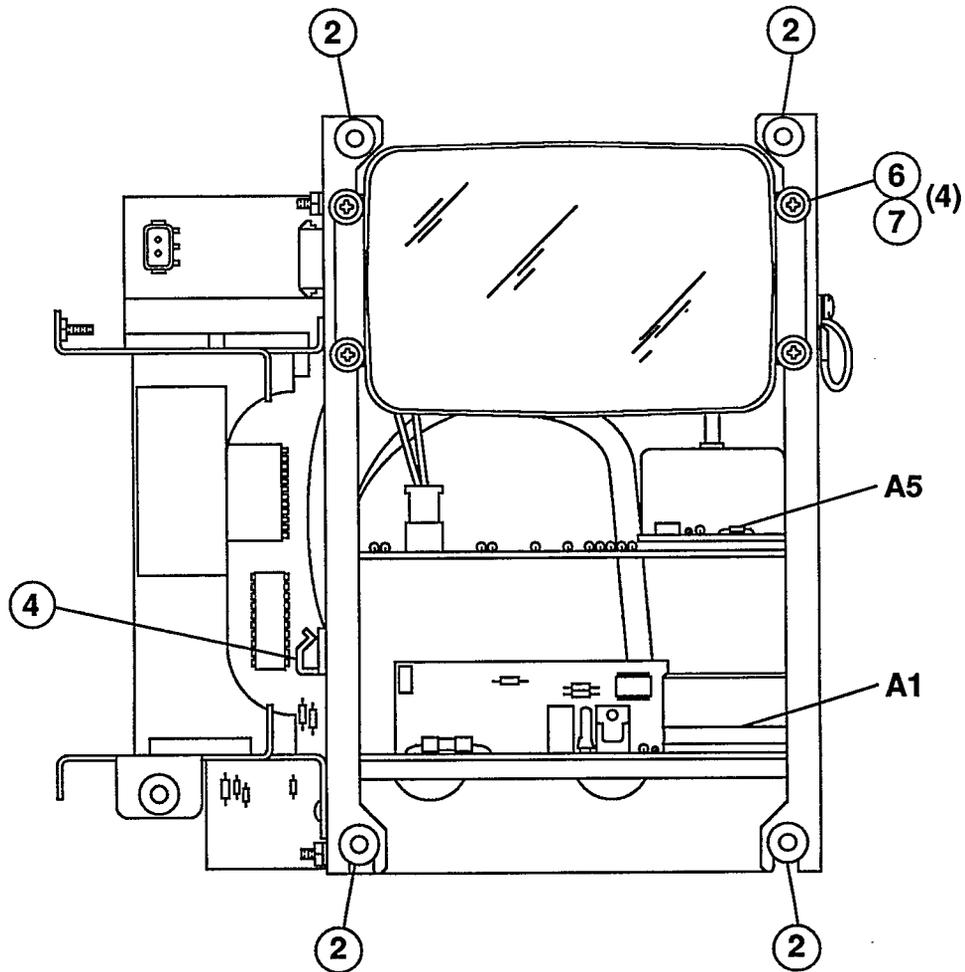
A2 Chassis Assembly Component Locator (Sheet 1 of 2).
